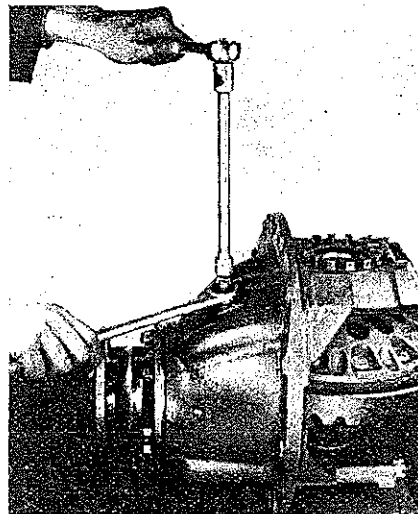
Adjusting thrust block clearance by means of adjusting screw
